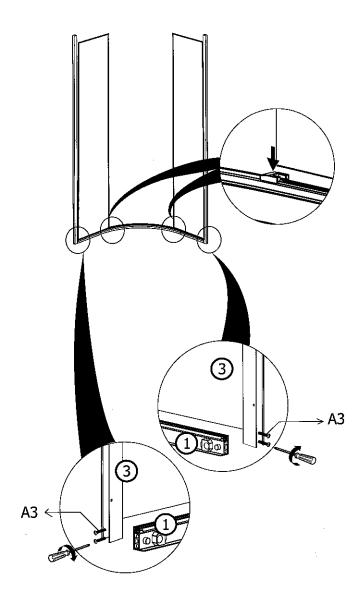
Install the bottom rail on the panel tracks using the screws, as shown on the illustration.
